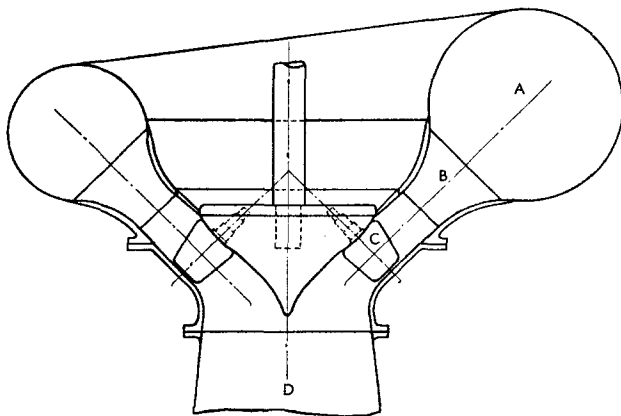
REVISED FORM OF SPIRAL CASING AND DIFFUSER
